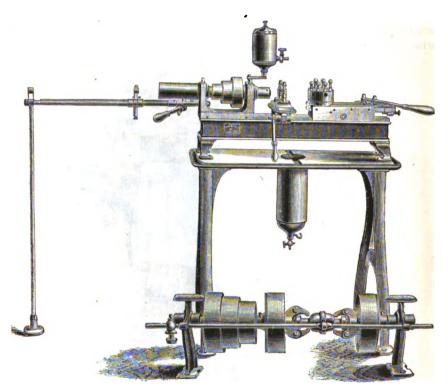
No. 1 revolving tool-head screwmachine, with wire-feed.
